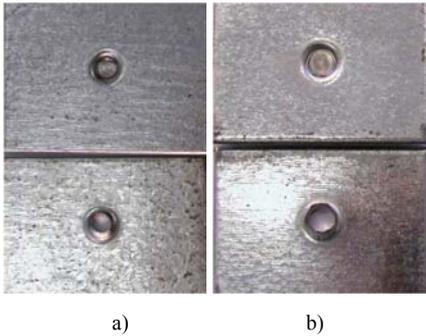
Dimension of the joined sample with sheet thickness of 1.5 mm (a) and 2.5 mm (b).
